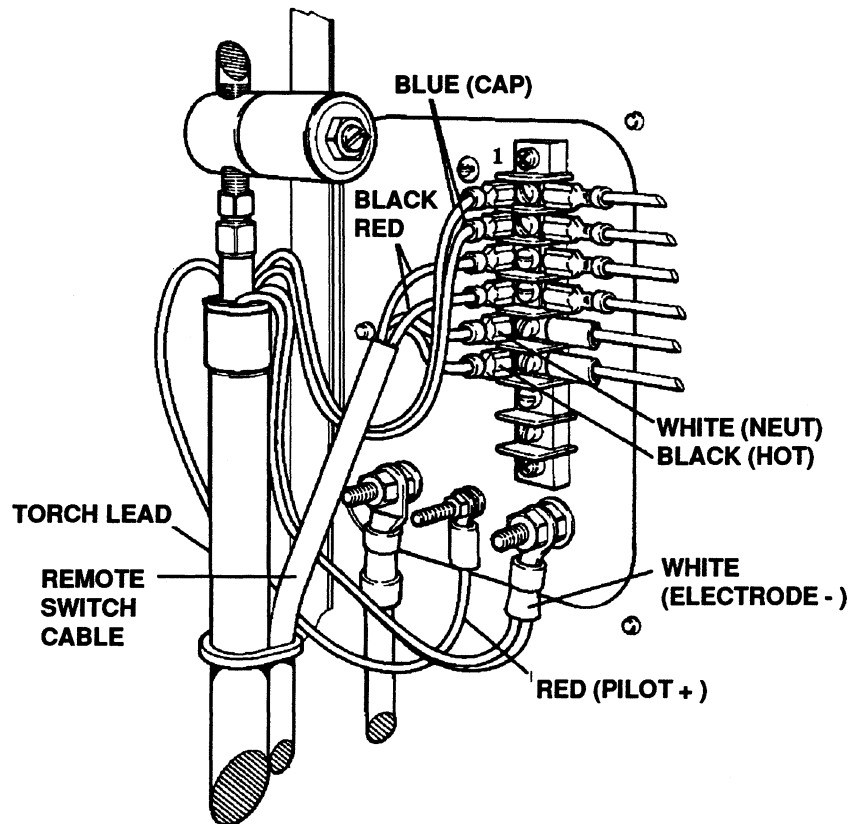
Machine Torch Lead and Remote Switch Connections at MAX40cs
